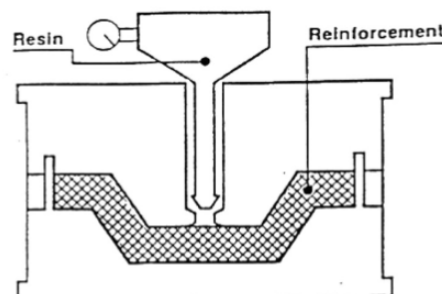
Resin Transfer Molding (RTM) process [97]
